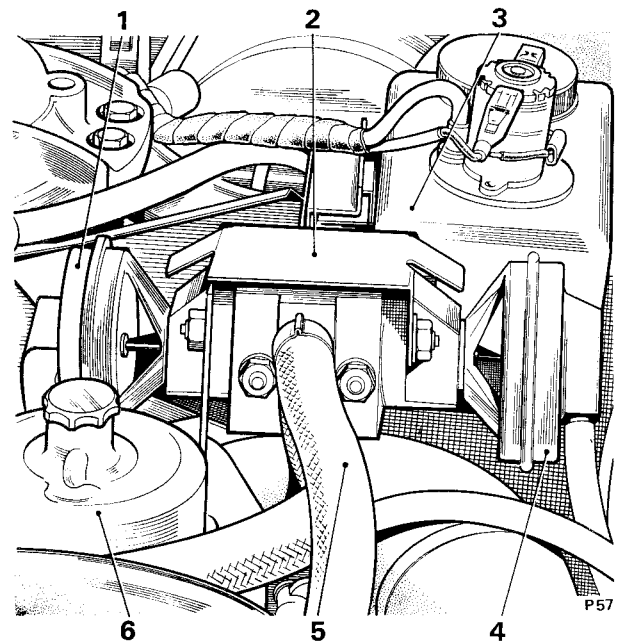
EXHAUST GAS RECIRCULATION VALVES
